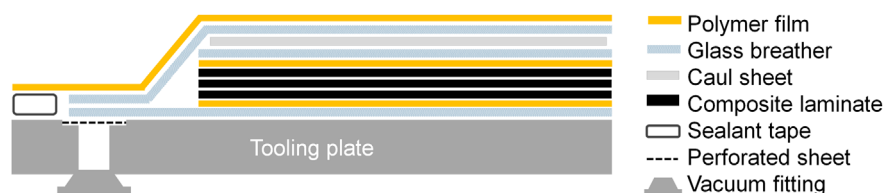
Vacuum bag setup for consolidation (Ref. [29])
